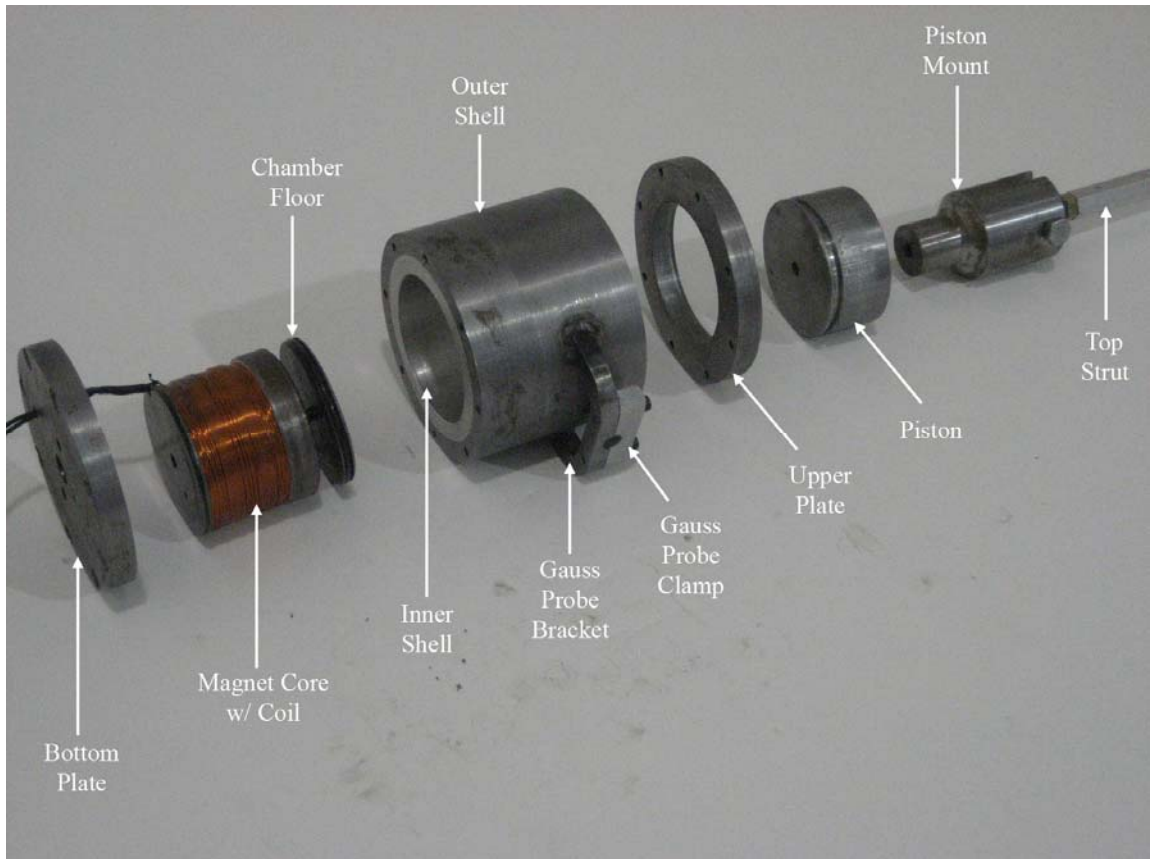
Exploded layout of the squeeze mode Rheometer (photo by Ryan Cavey)
